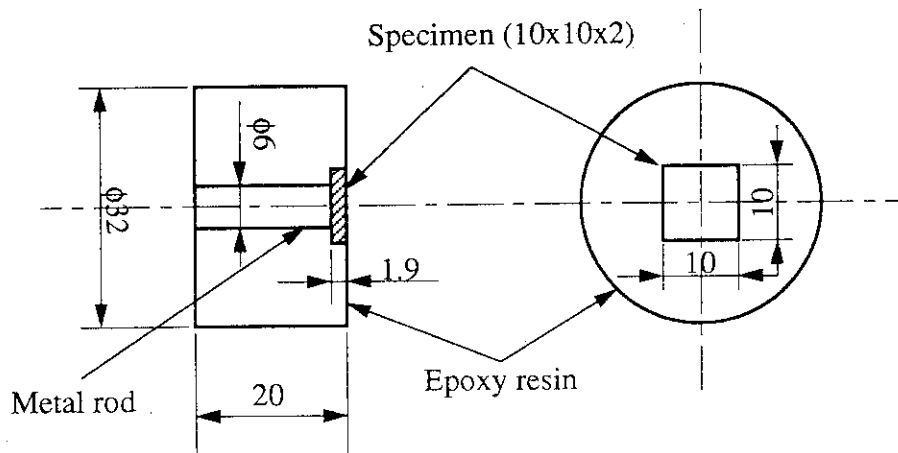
Specimen mounted in epoxy resin with metal rod for the electrochemical corrosion tests. (unit : mm)
